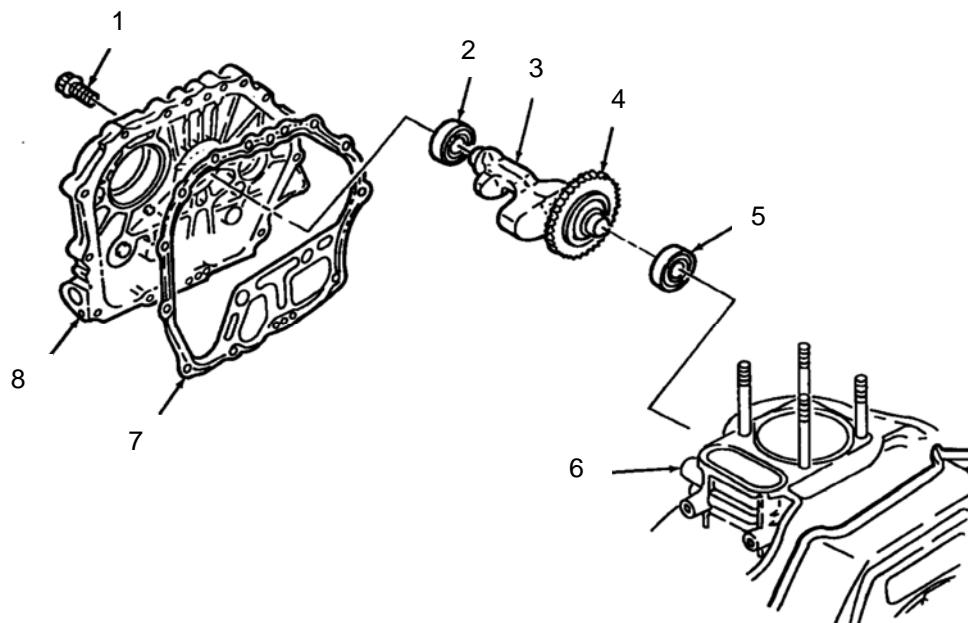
Inspect Balancer Shaft (Sheet 1 of 2).
